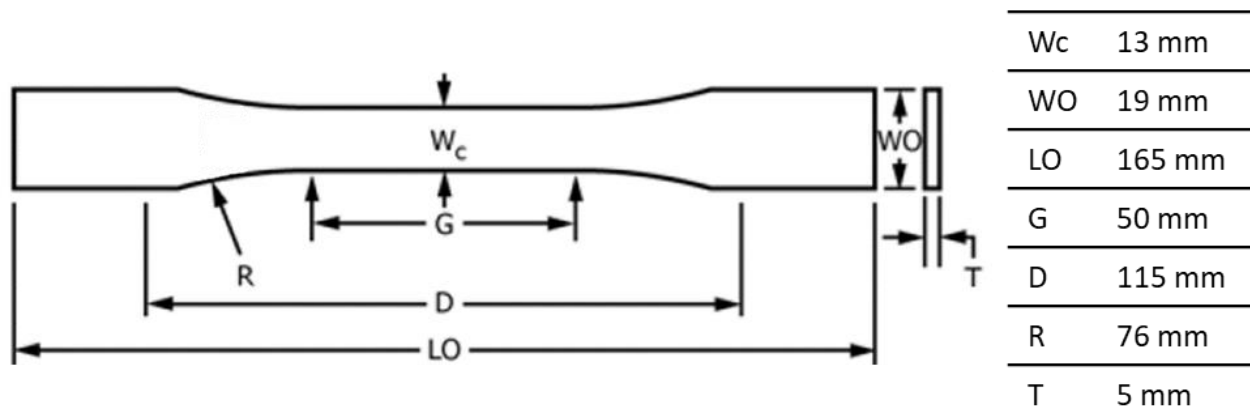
Flat tensile specimen geometry and major dimensions, adapted from [7]
